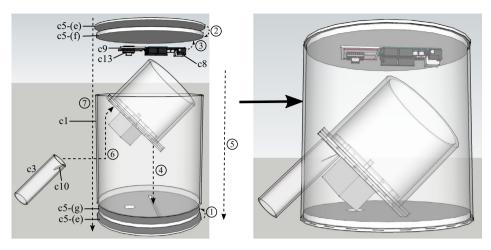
Assembly of all the parts; c1, c3, c5, c8, c9, c19 and c13 are described in Section 3.1; circled numbers represent order of assembly.
